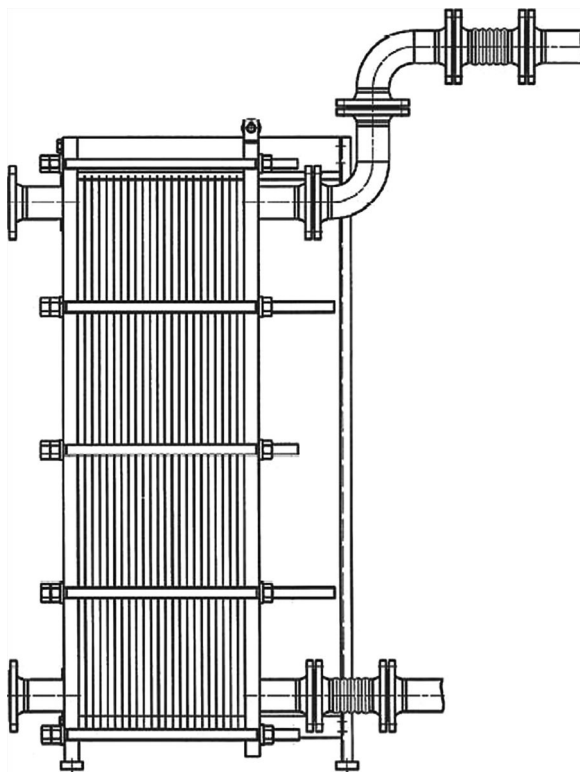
The opening space of the PHE, which is between the pressure plate and support, should not be obstructed by fixed piping. (Courtesy of HRS Heat Exchangers Ltd, Herts, U.K.)
